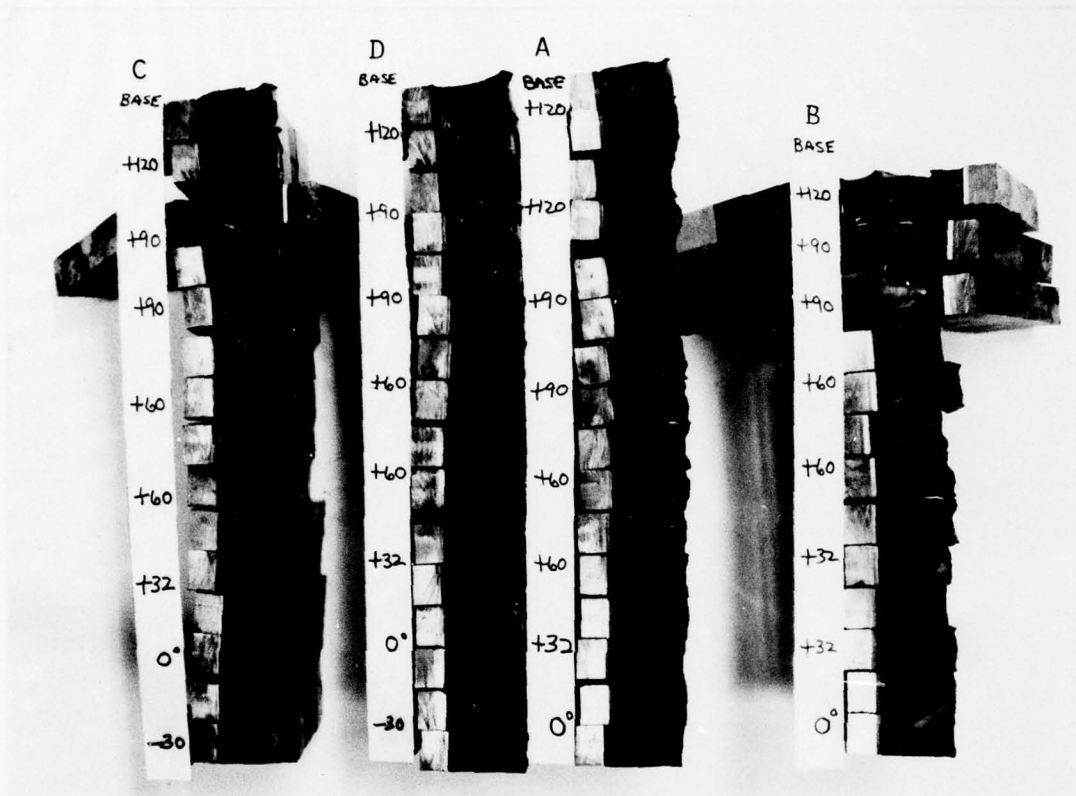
DYNAMIC TEAR FRACTURE SURFACES OF BASE-METAL SPECIMENS
